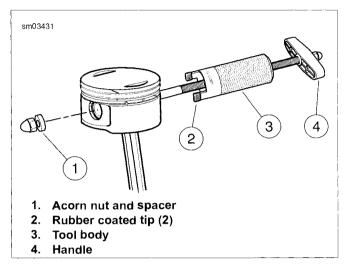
Removing Piston Pin with HD-42320-A Piston
